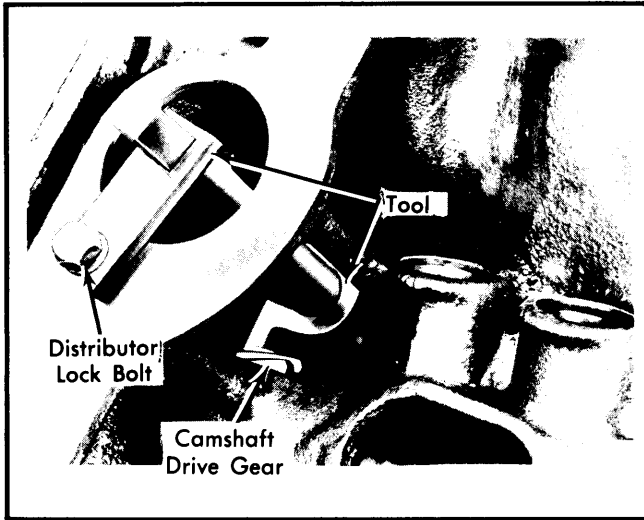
Camshaft Holding Tool (C-3509) Installed
